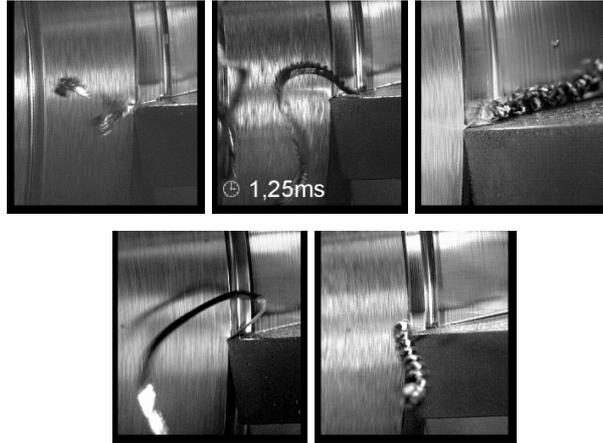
Examples of different steel chip formation during hard turning of cold work tool steel (X165CrV12)
